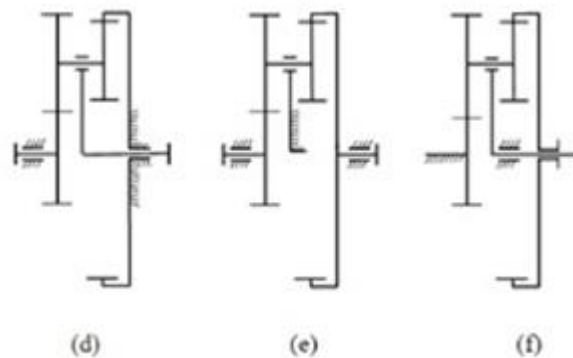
Schematic of compound epicyclic gear layouts: d) Compounded Planetary gear; e) Compounded Star gear; f) Compounded Solar gearing systems; (Yu, 1987).
